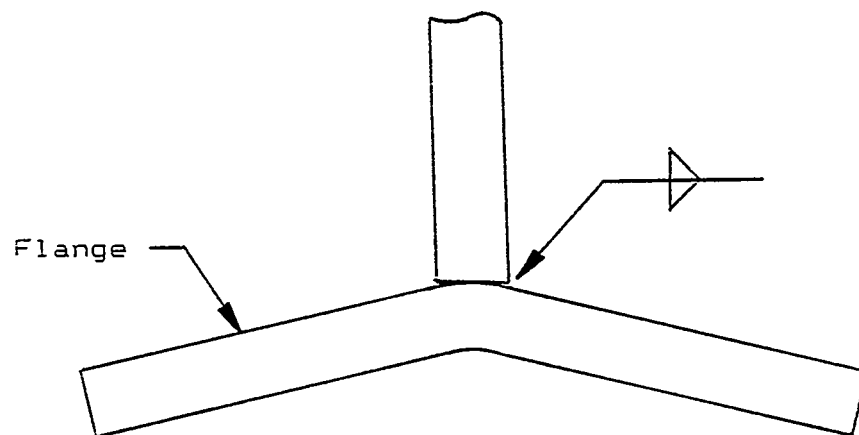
Prebending of plate to offset the angular distortion of fillet welds
